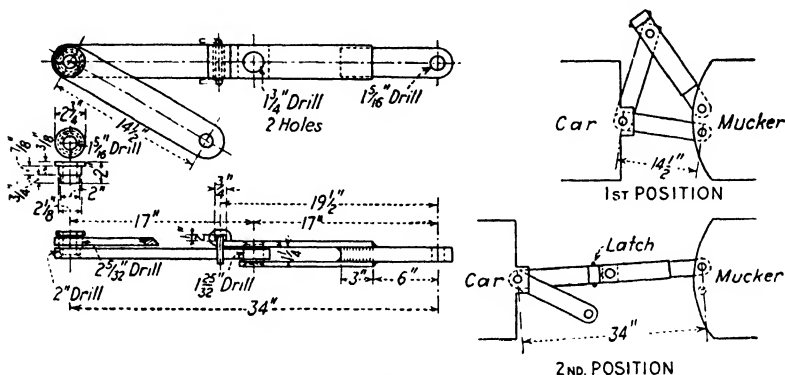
Coupler for Conway mucker. The short connection is used first for loading the rear end of the car. Then the long connection is used while loading the front end.
